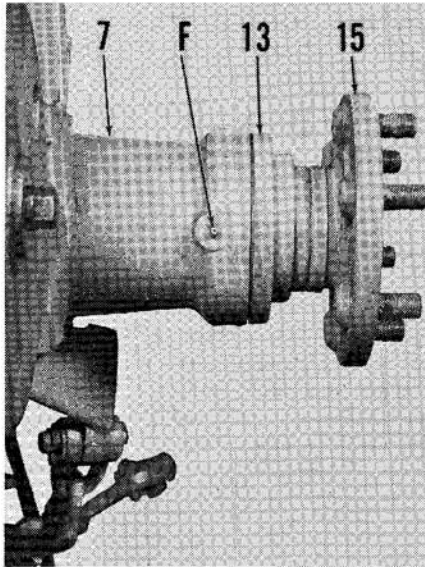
Rear axle oil seal retainer (13) is staked into groove in rear axle housing (7). Axle outer bearing is lubricated from grease fitting (F). Refer to Fig. 160 for exploded view of rear axle (15), housing and related parts.
